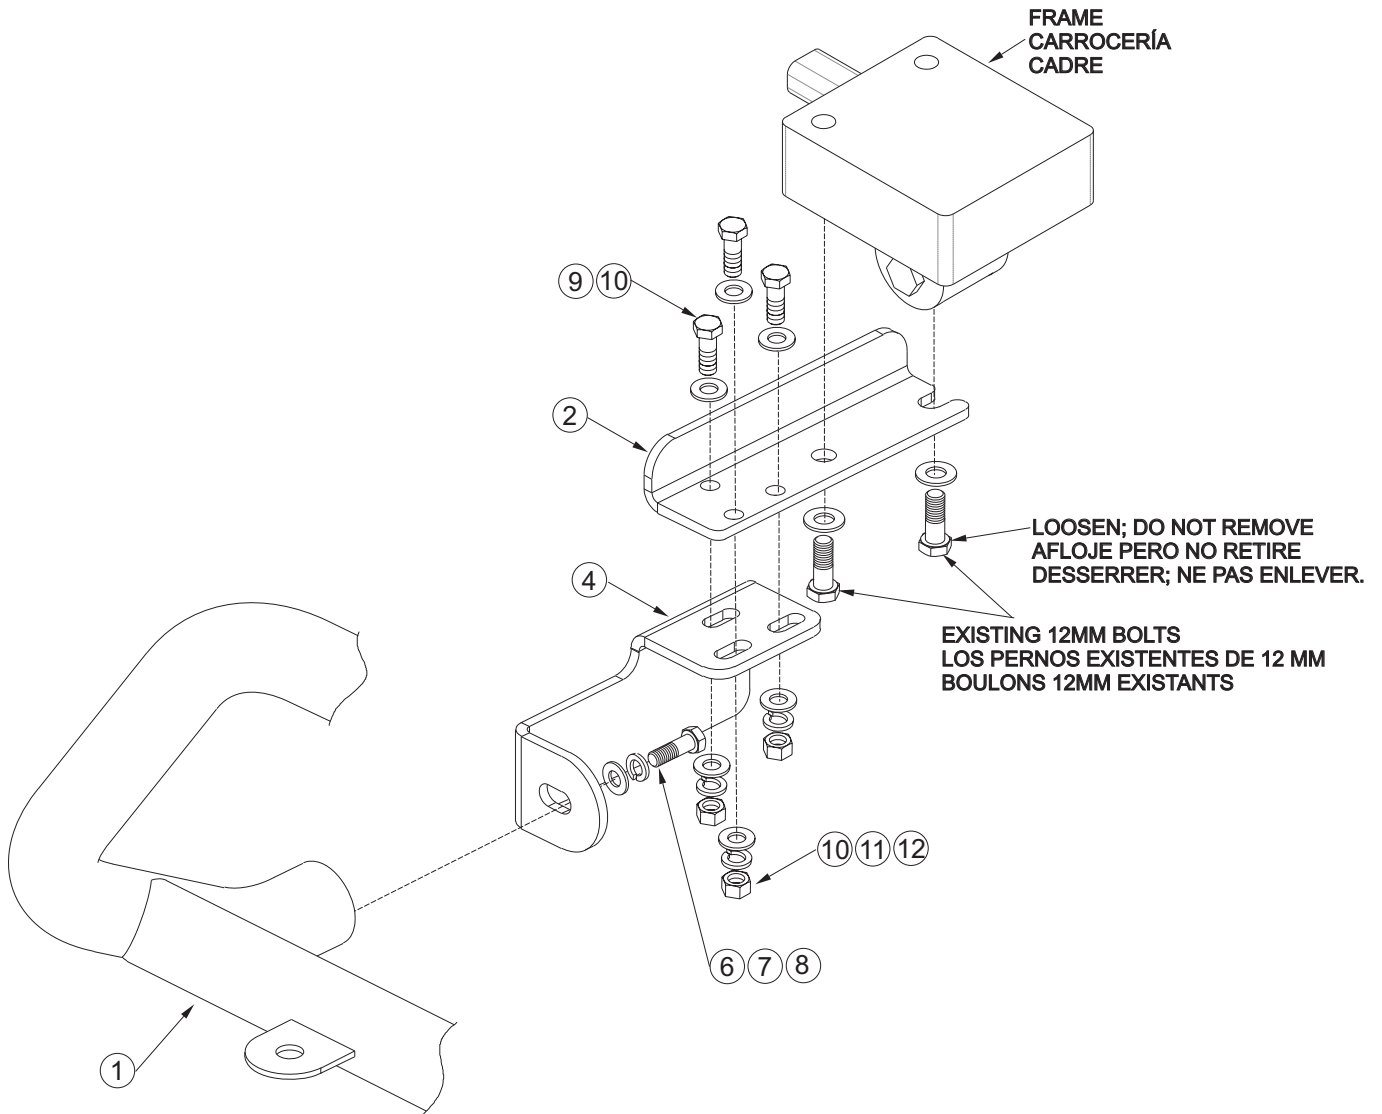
INSTALLATION VIEW OF PASSENGER SIDE, DRIVER SIDE OPPOSITE
